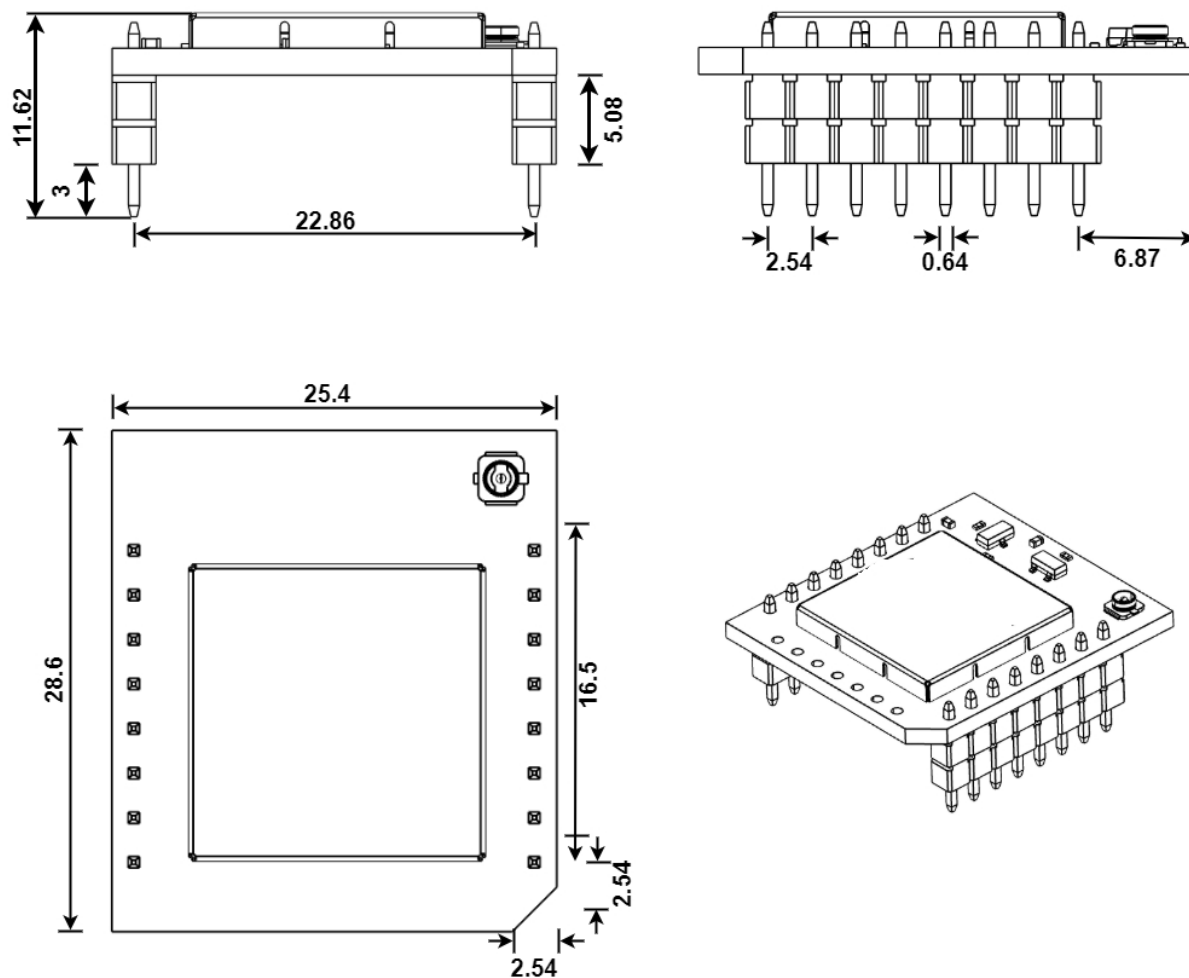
ZWave 700 Module - Dimensions (for mounting on female headers)
